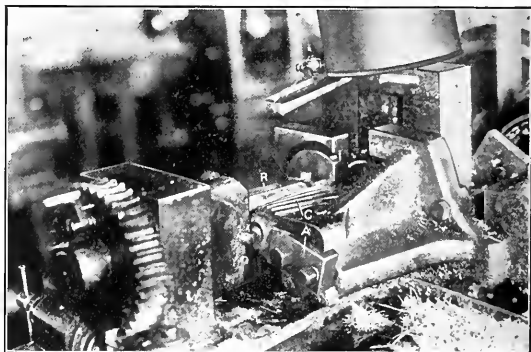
Rotating Fixture used for milling Round Bottoms of Receivers
